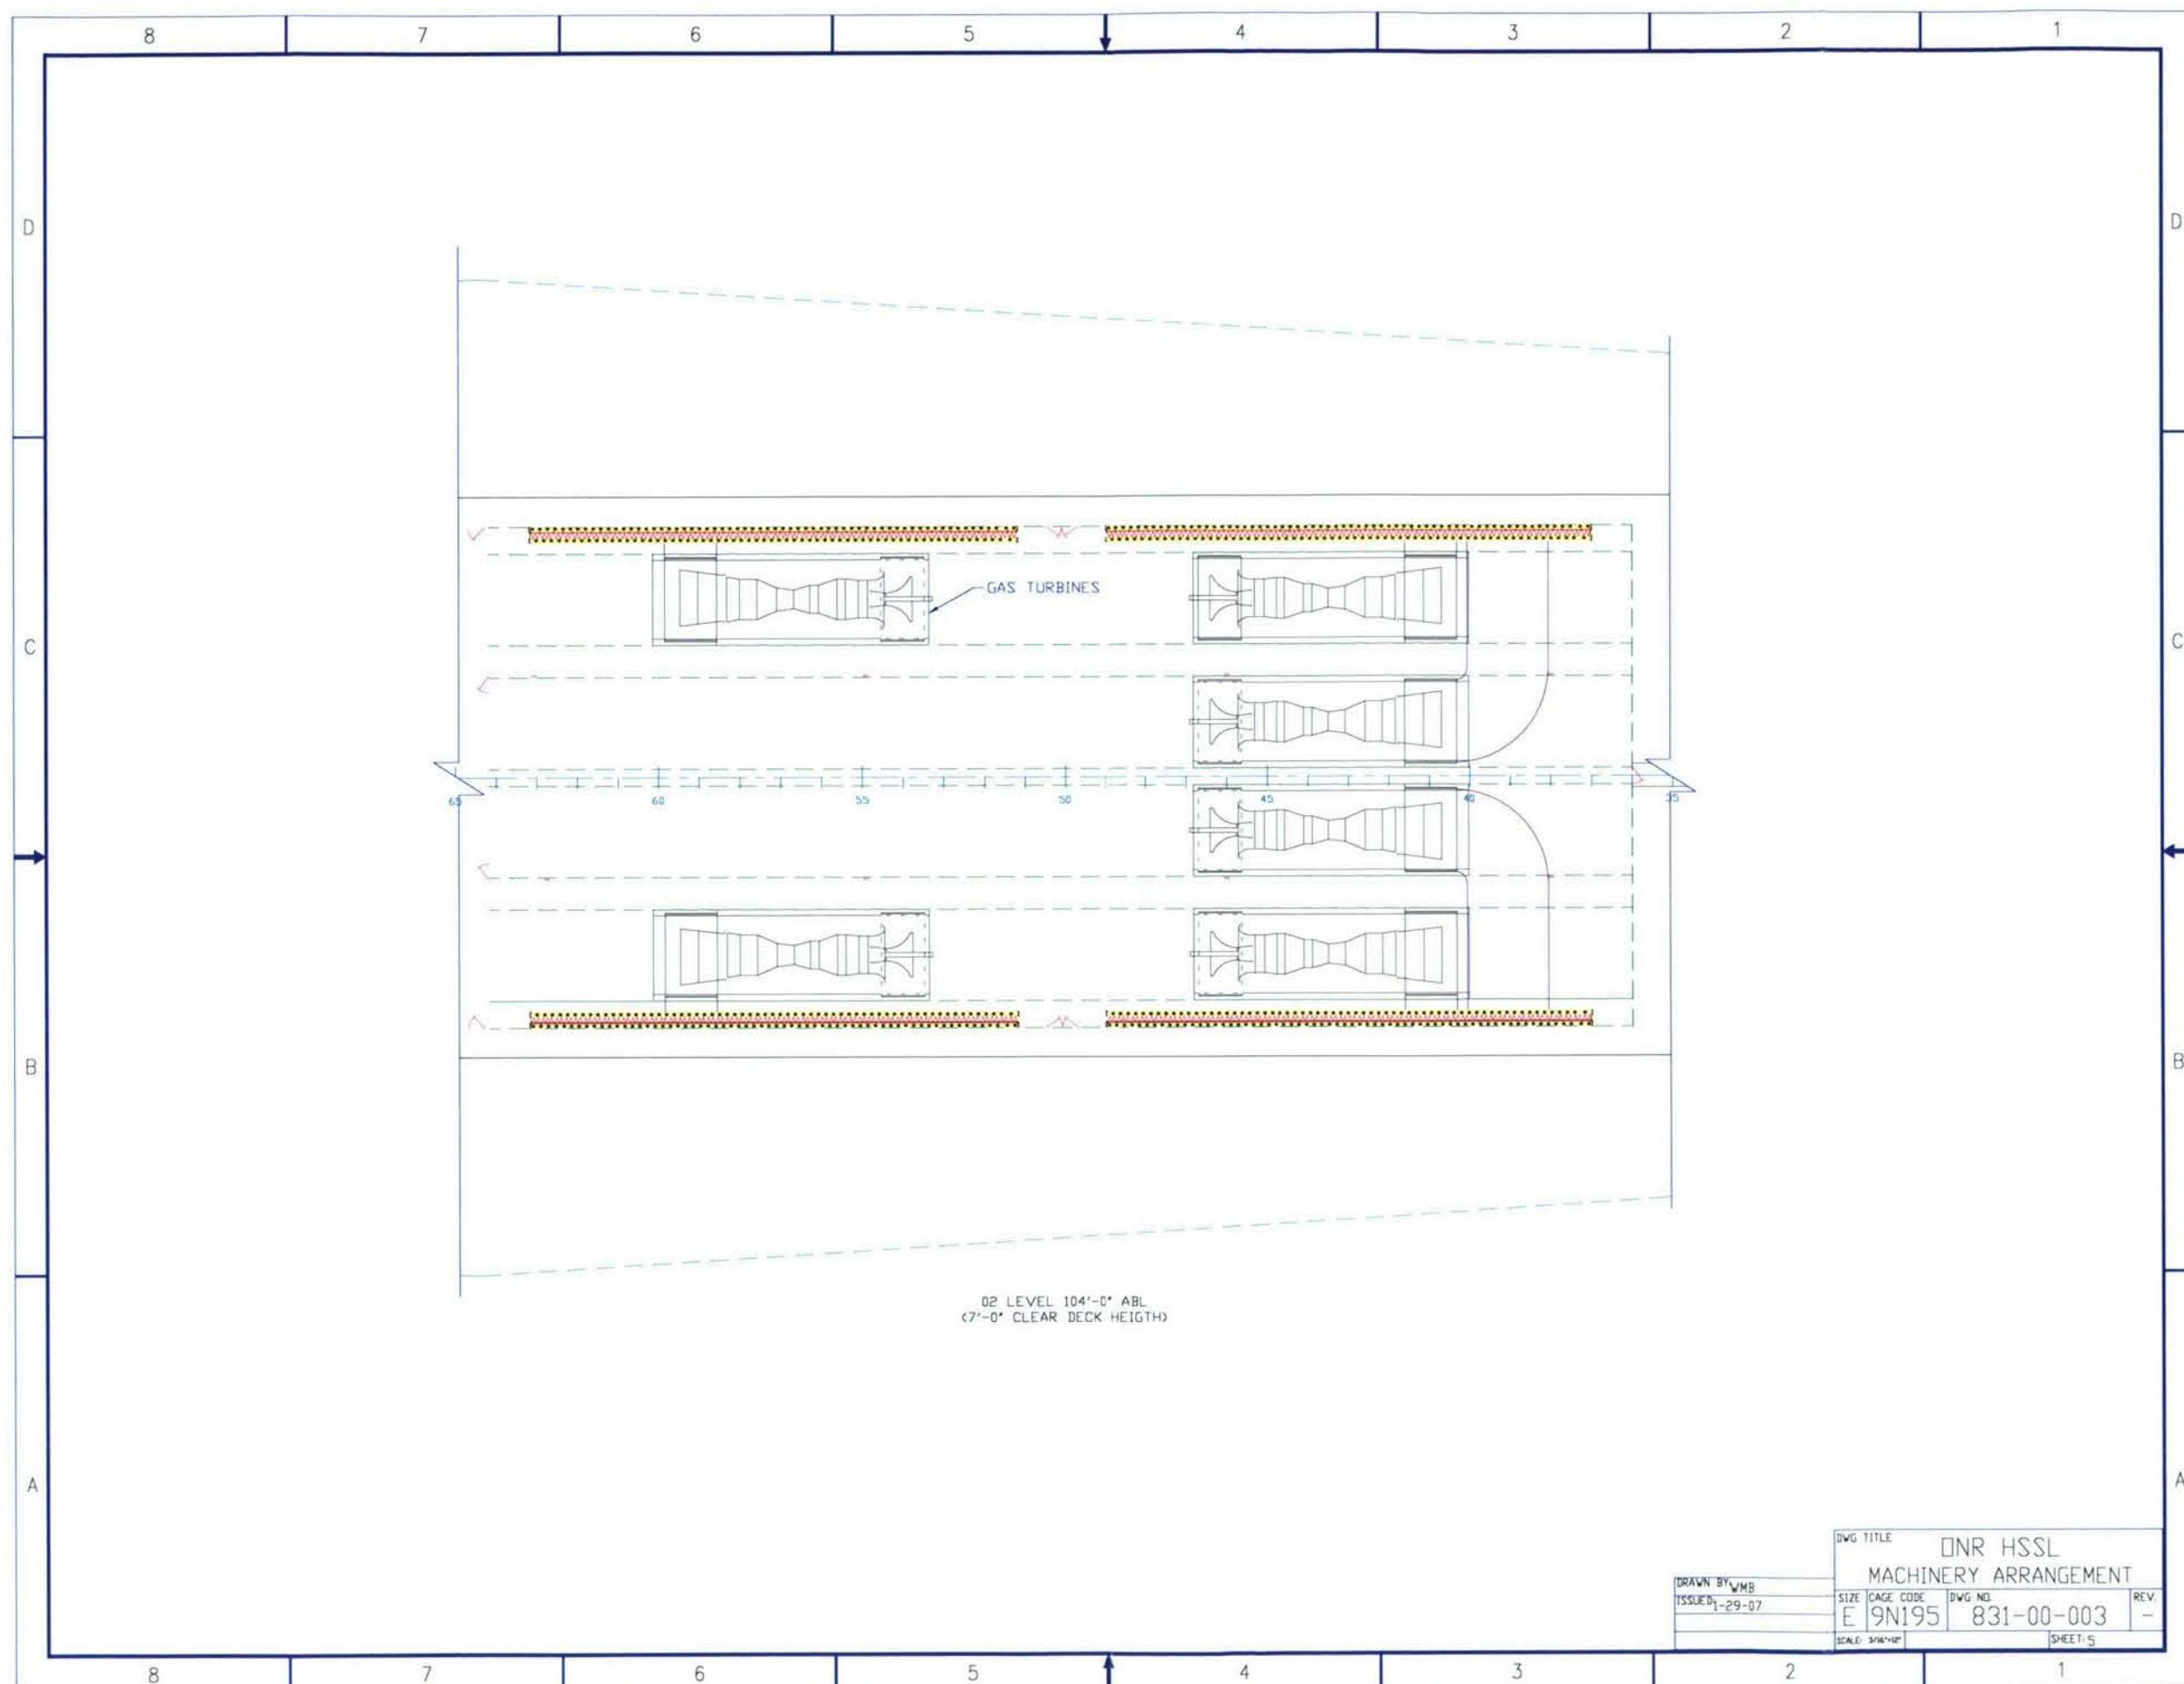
Plan View of Gas Turbine Generator (GTG) Machinery Room
